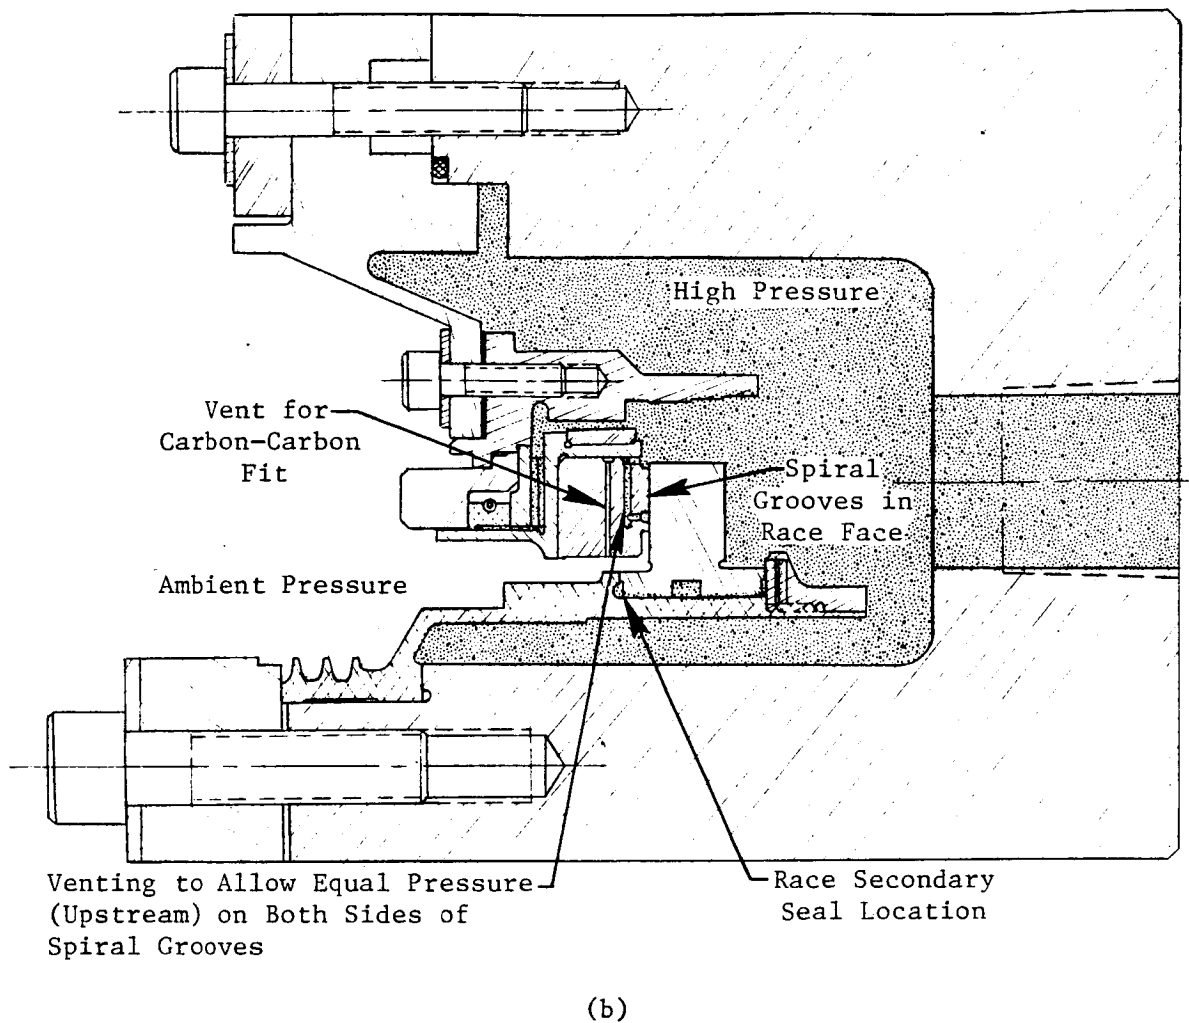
Final Design Assembled in Static Test Fixture. (Concluded)
